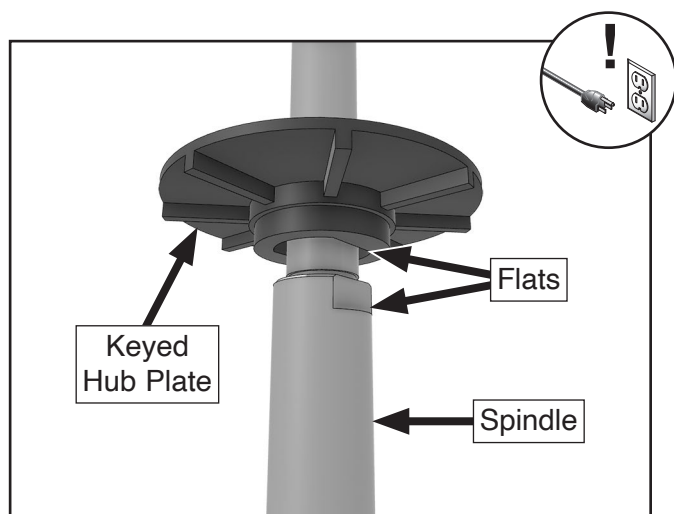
Keyed hub plate flats aligned with spindle shaft base flats (table removed for clarity).
